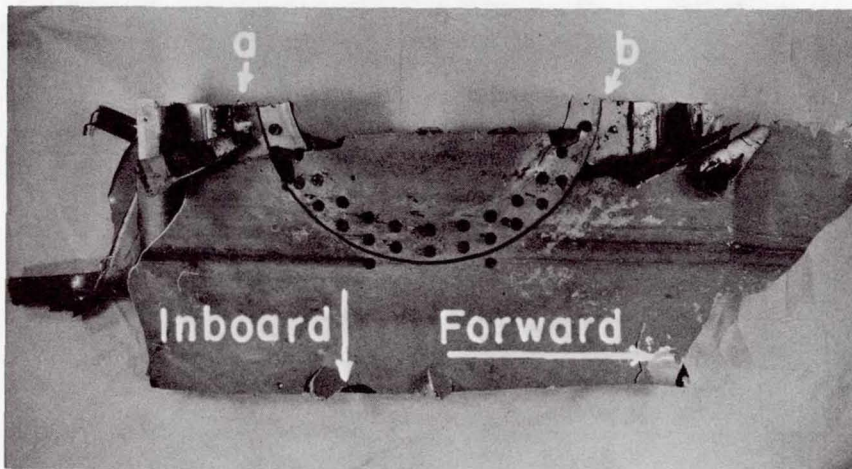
Piece of the lower surface of the right wing, including the inboard end of the No. 1 access door. Arrows "a" and "b" indicate the location of fatigue fractures. X 1/8.
